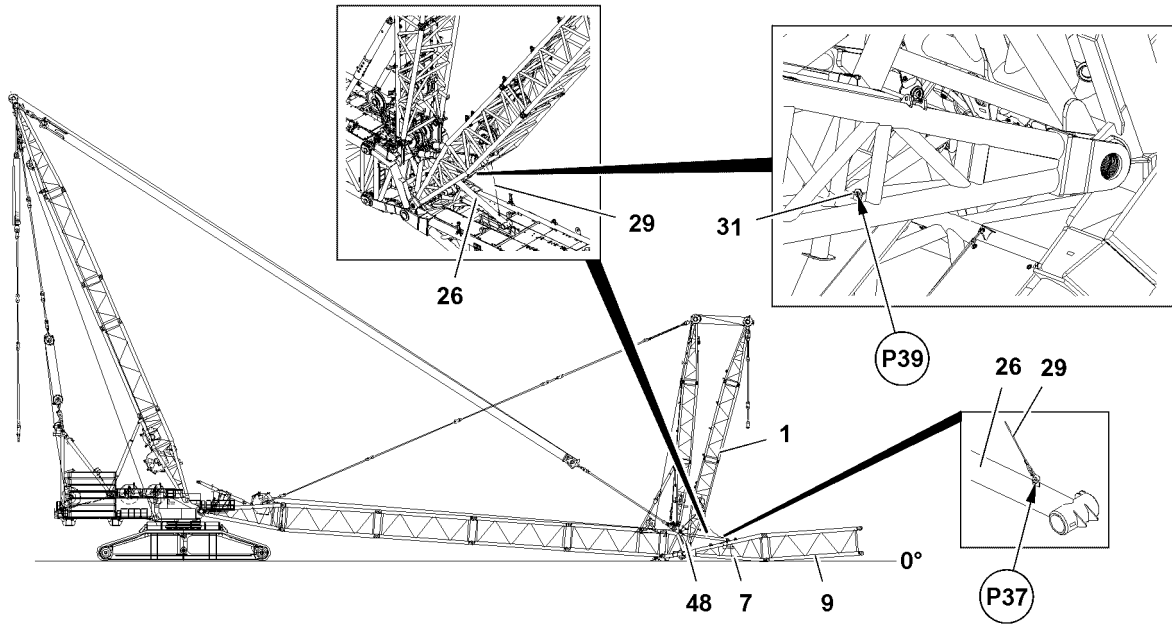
Pinning the W-pivot section — Fastening the retaining rope in the park position
